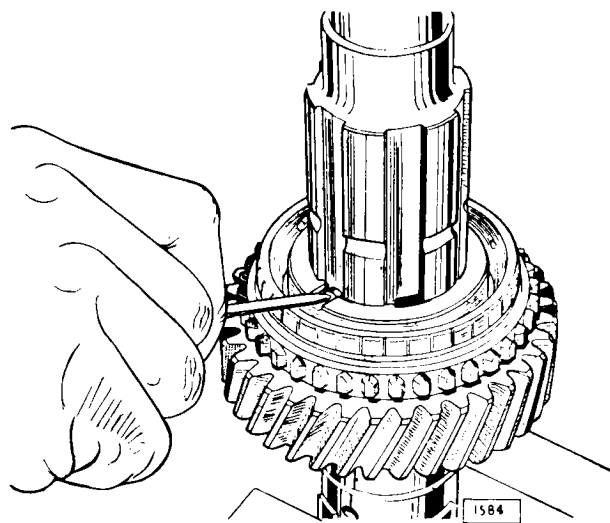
Depressing the 2nd speed thrust washer plunger.
